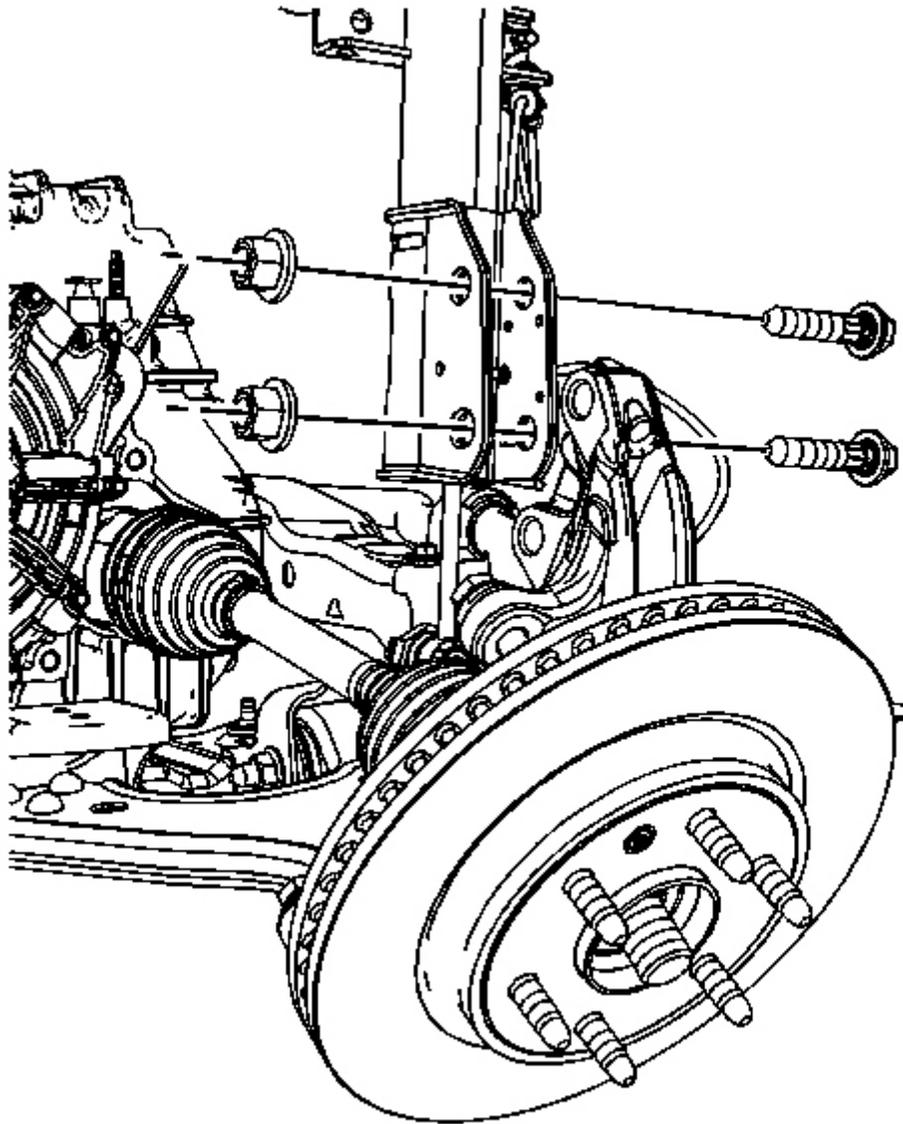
Identifying Front Strut Mounting Bolts & Nuts
